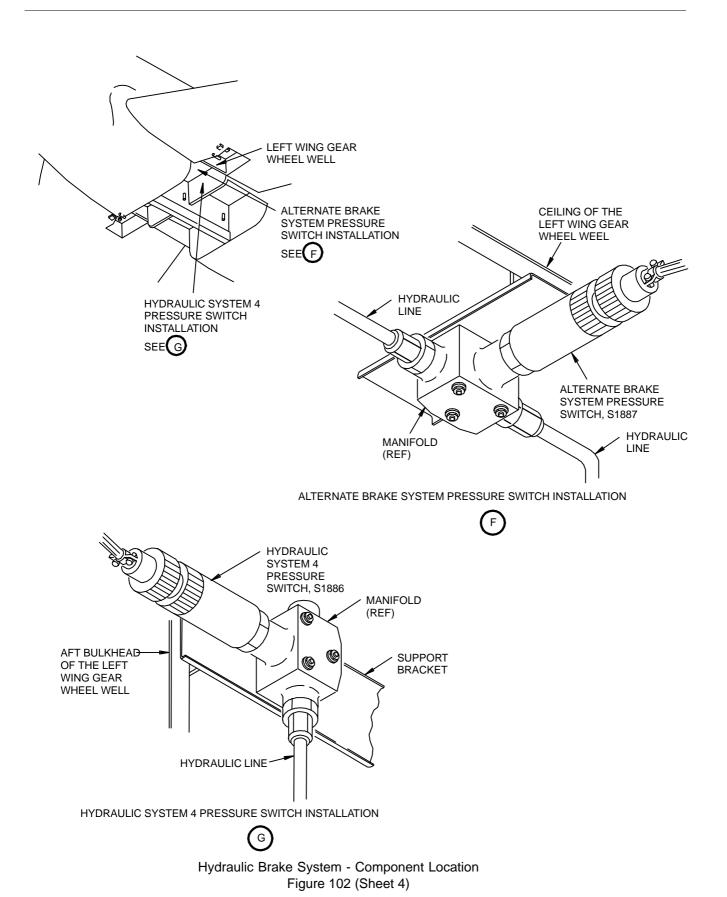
32-41 Hydraulic Brake Sys. Comp. Location Fig. 102 (Sheet 4)
